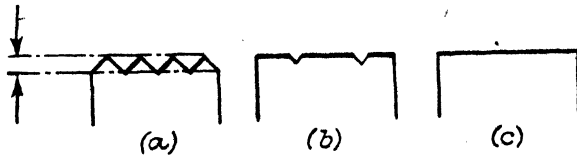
Sketch of surface finishes. (a) Normal turned surface. (b) Superfinished surface. (c) Theoretical ideal surface.
